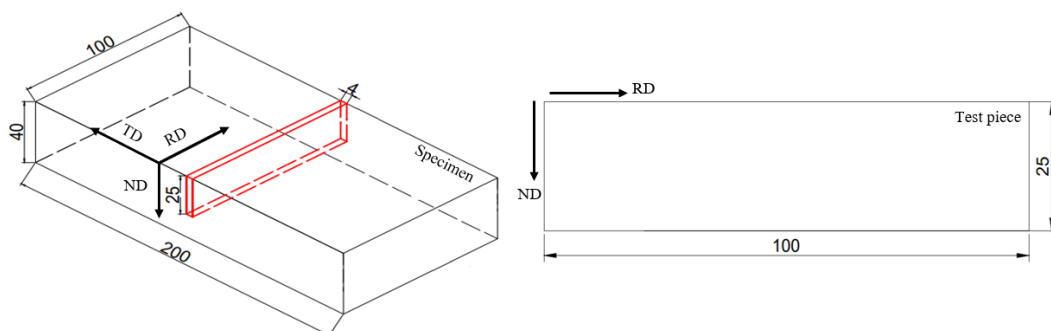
The dimensions of the specimen and the test piece (a) Specimen (b) Test piece
